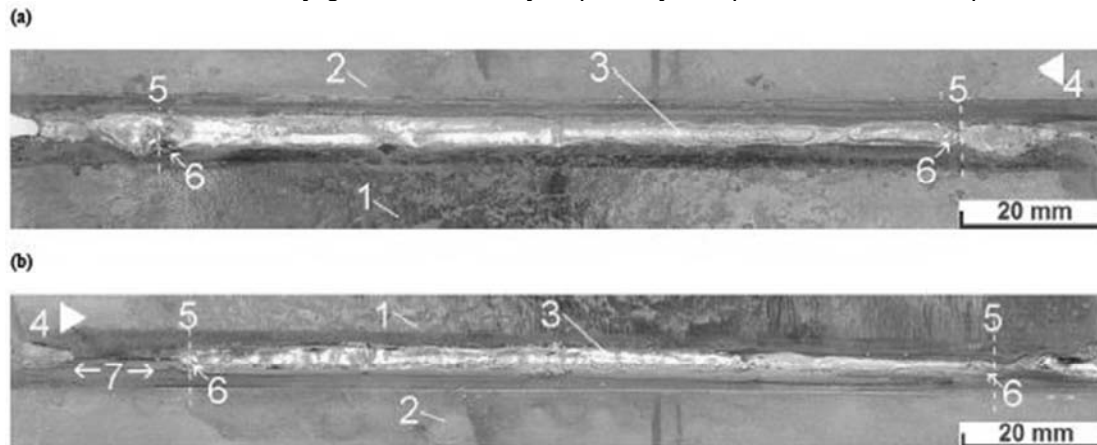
Outer appearance of root layer of GMA welded rail foot after parameter optimization. (a) bottom view 1st pass (b)... bottom view 2nd pass. 1...rail foot 2... weld pool backing strip 3... Weld root 4... Welding direction 5... Sidewise run-in and run-out delimitation lines 6... TIG weld spot for fixation 7...no root
